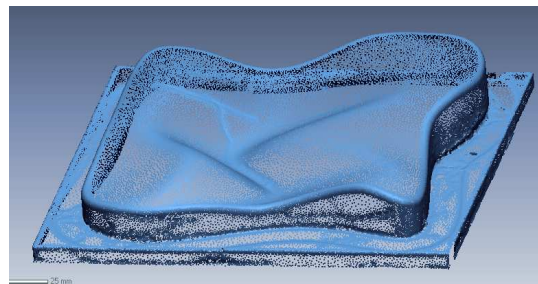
CNC Machined Part (Freeform Surface Model)
